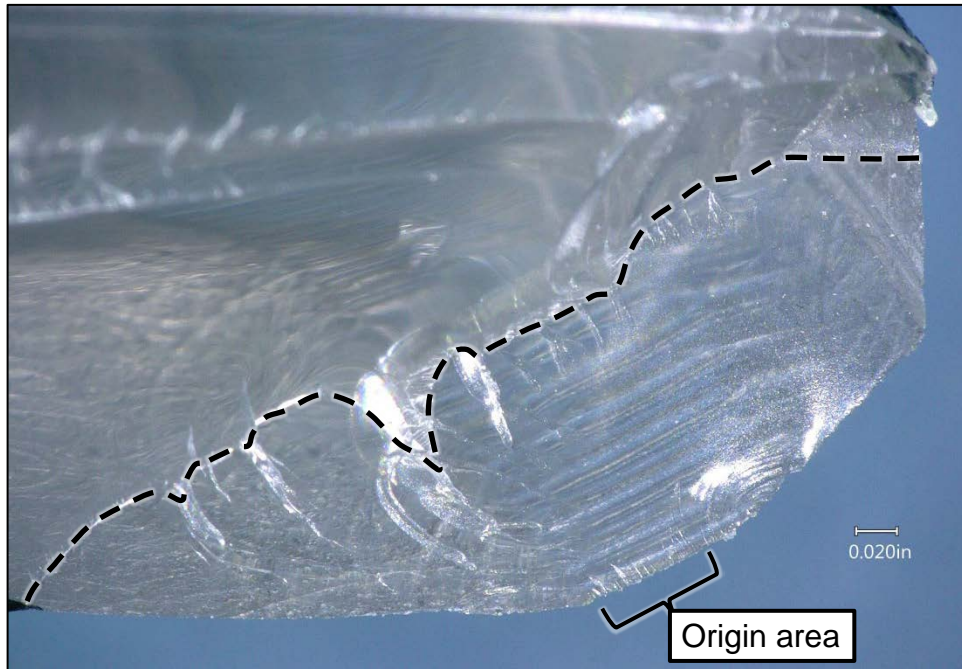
Optical image of the largest crack in the piece from the upper right side after lab fracture. A dashed line indicates the boundary of the crack.
